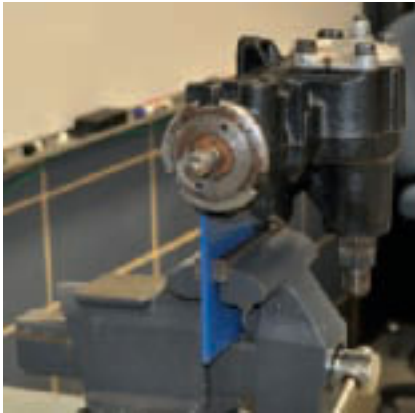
Stub shaft flat facing upward and parallel with the side cover.
